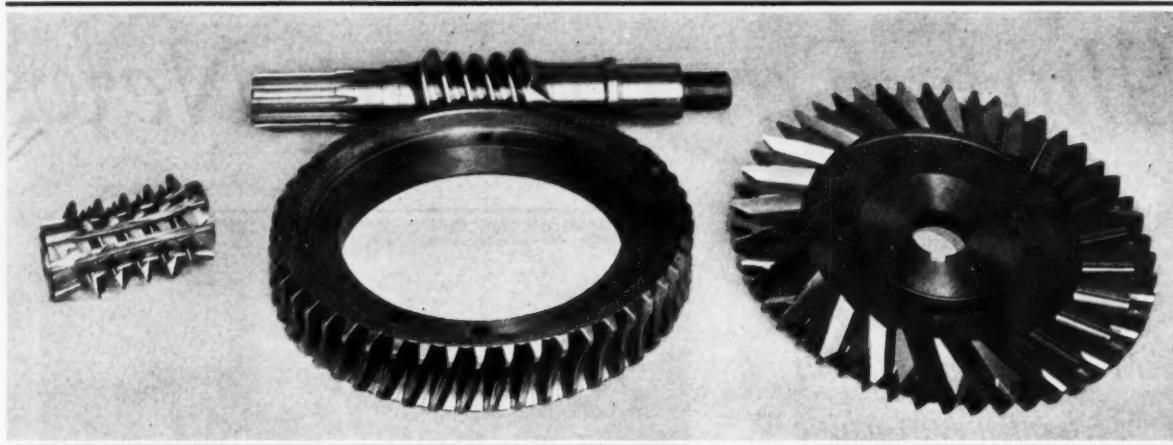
A Set of Cone Worm-gears with the Hobs Used to Produce the Gear and Worm
